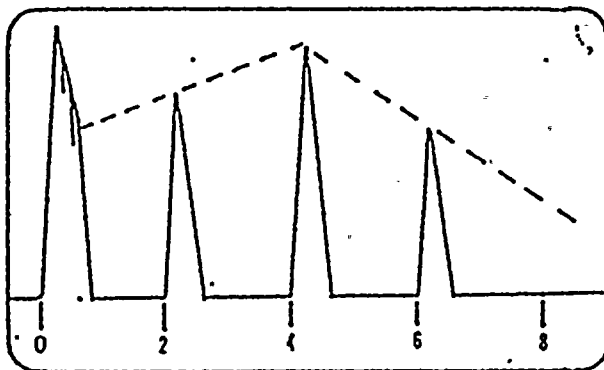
ULTRASONIC REFERENCE STANDARD, PIF-4.31C, FOR CLOSURE HEAD TO NOZZLE WELDS.
